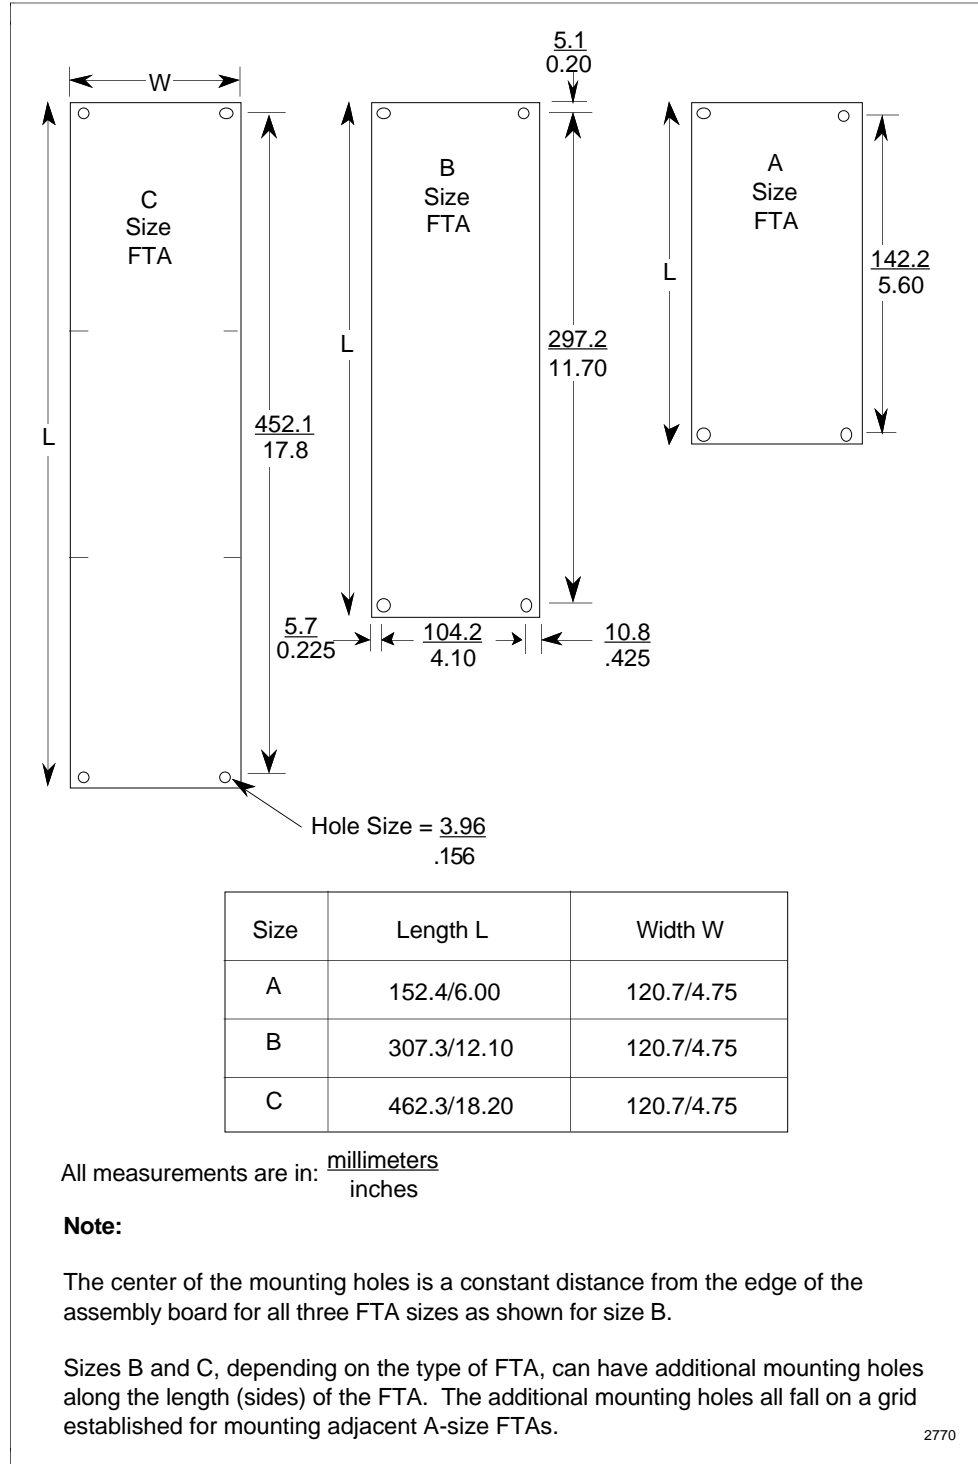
illustrates the mounting dimensions of the three FTA sizes.
